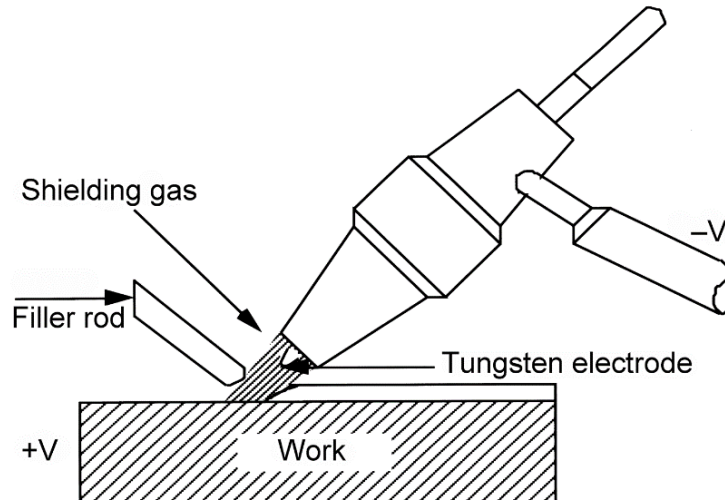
Schematic representation of a gas tungsten arc welding process [7].
